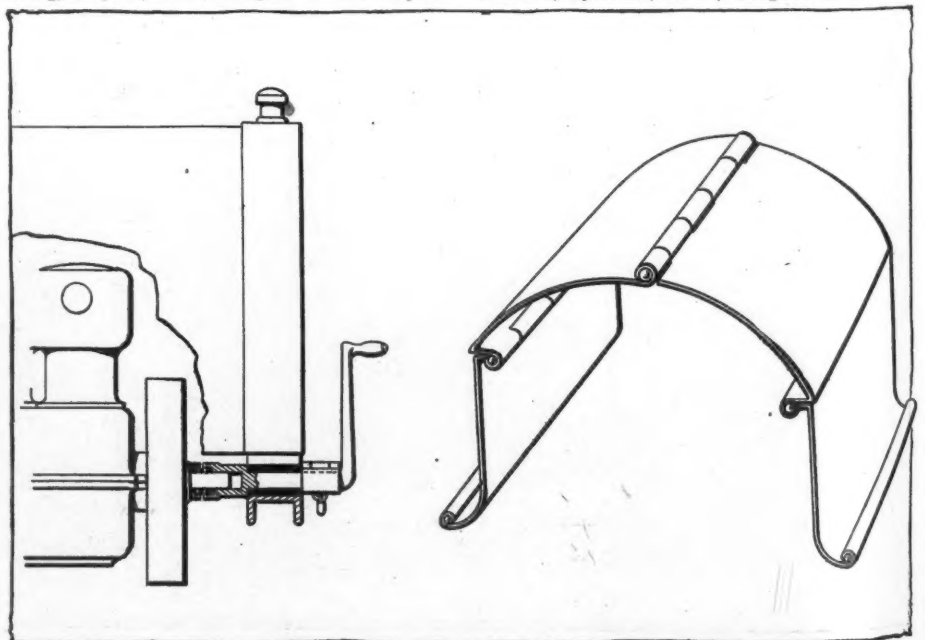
DAVIS CRANK LOCK AND BRISCOE HOOD
